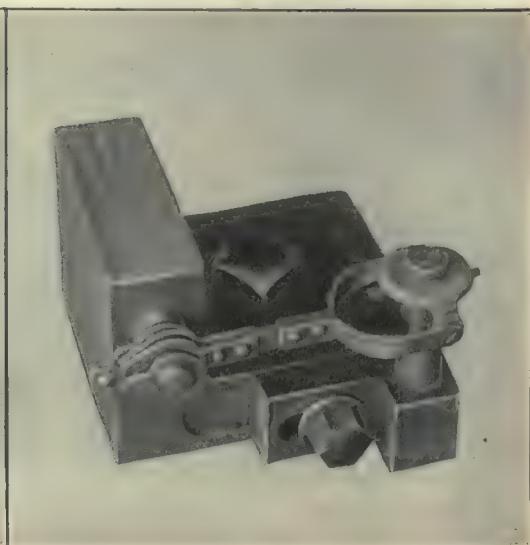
INSPECTING HOLES OF LIFT LEVER
